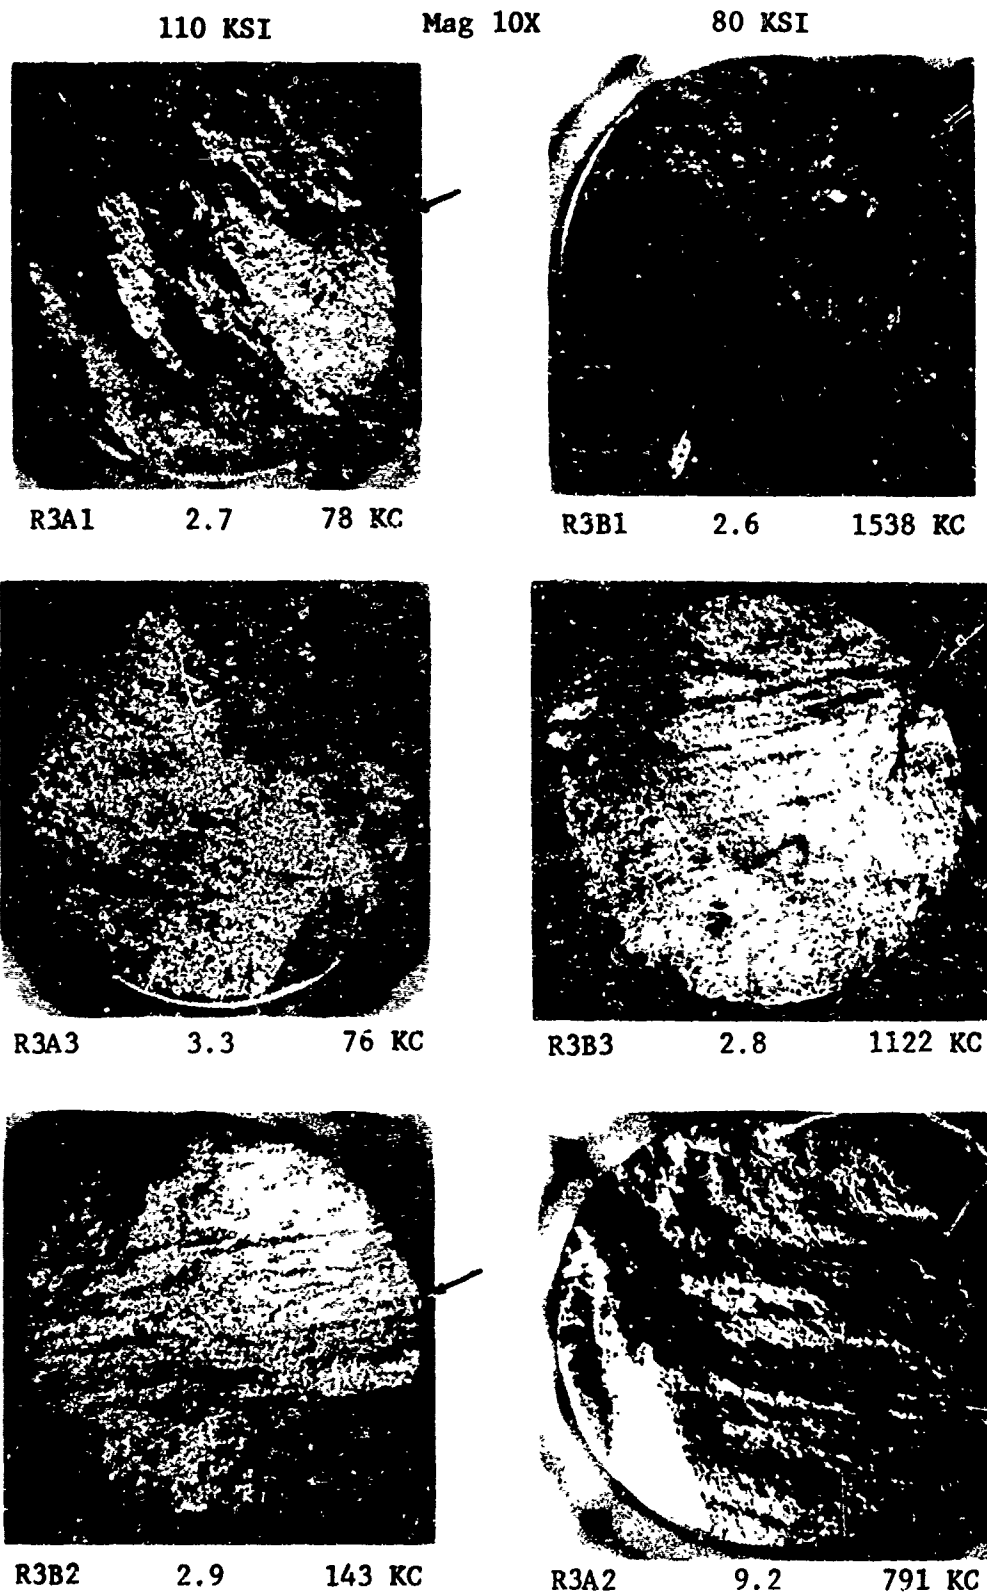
Fracture Surfaces of Failed Fatigue Specimens Series R3-
